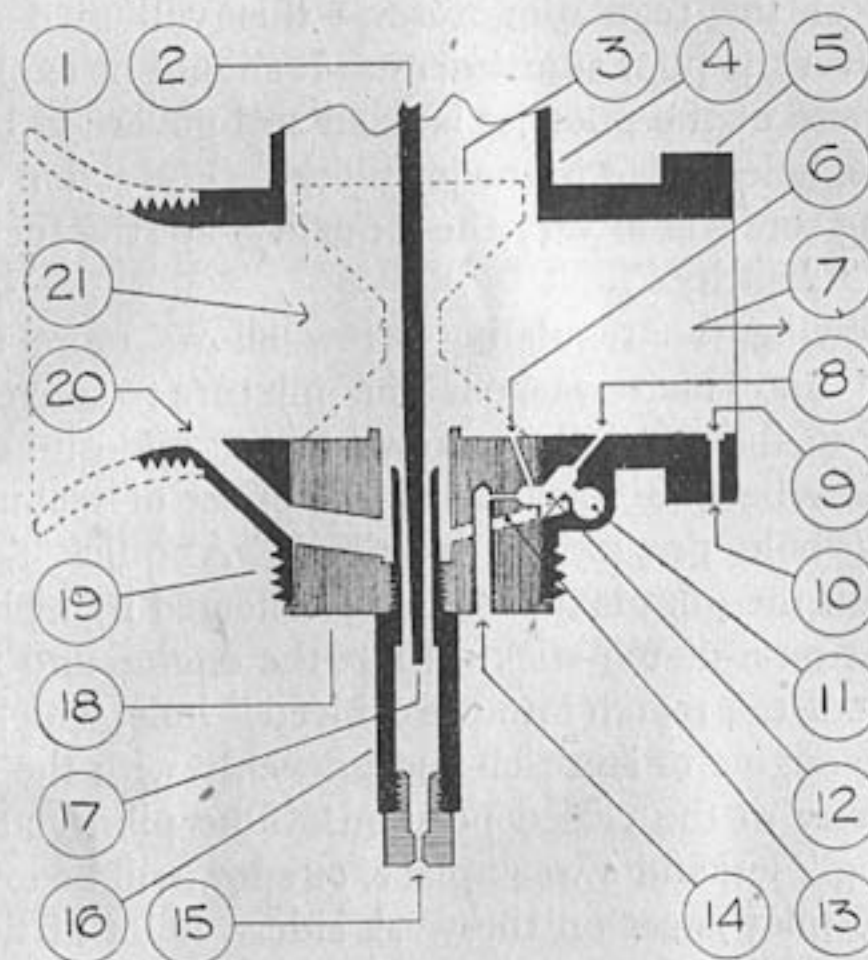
CARBURETTER JET BARREL OR CHOKE.
